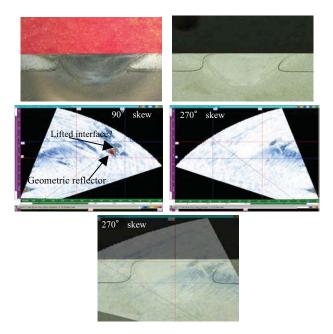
Top left: 1- to 2-minute HF etch of a cross-section from the 2000 rpm Pin and Shoulder Scroll tool FSP without cooling. Top right: 60 minute NaOH etch of a cross-secton from the 2000 rpm Pin and Shoulder Scroll tool without cooling. Center left to right: 90 and 270-degree skew PAUTs of the 2000 rpm specimen at the location of cross-sections shown at top right. Note the Geometric Reflector and possible lifted interface in the 90-degree skew and the absence in the 270-degree skew. Bottom: 60 minute NaOH etched cross-secton (from top right) overlaid with the 270-degree skew phase array UT (center right).
